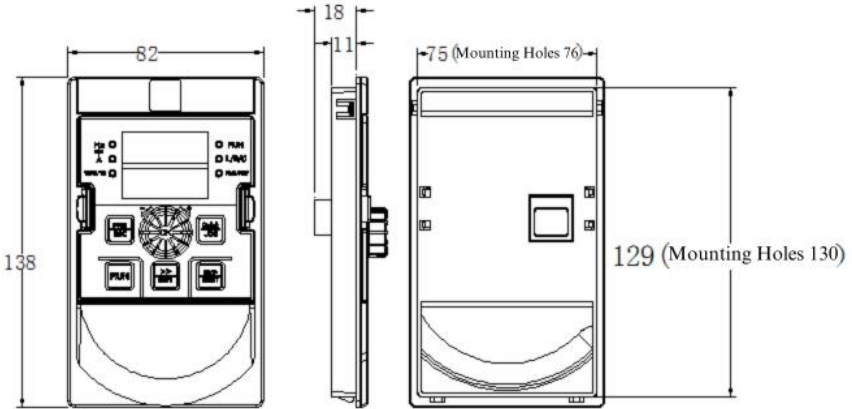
380V (4T) 4.0kW or more External Keypad with Tray Mounting Dimensions
